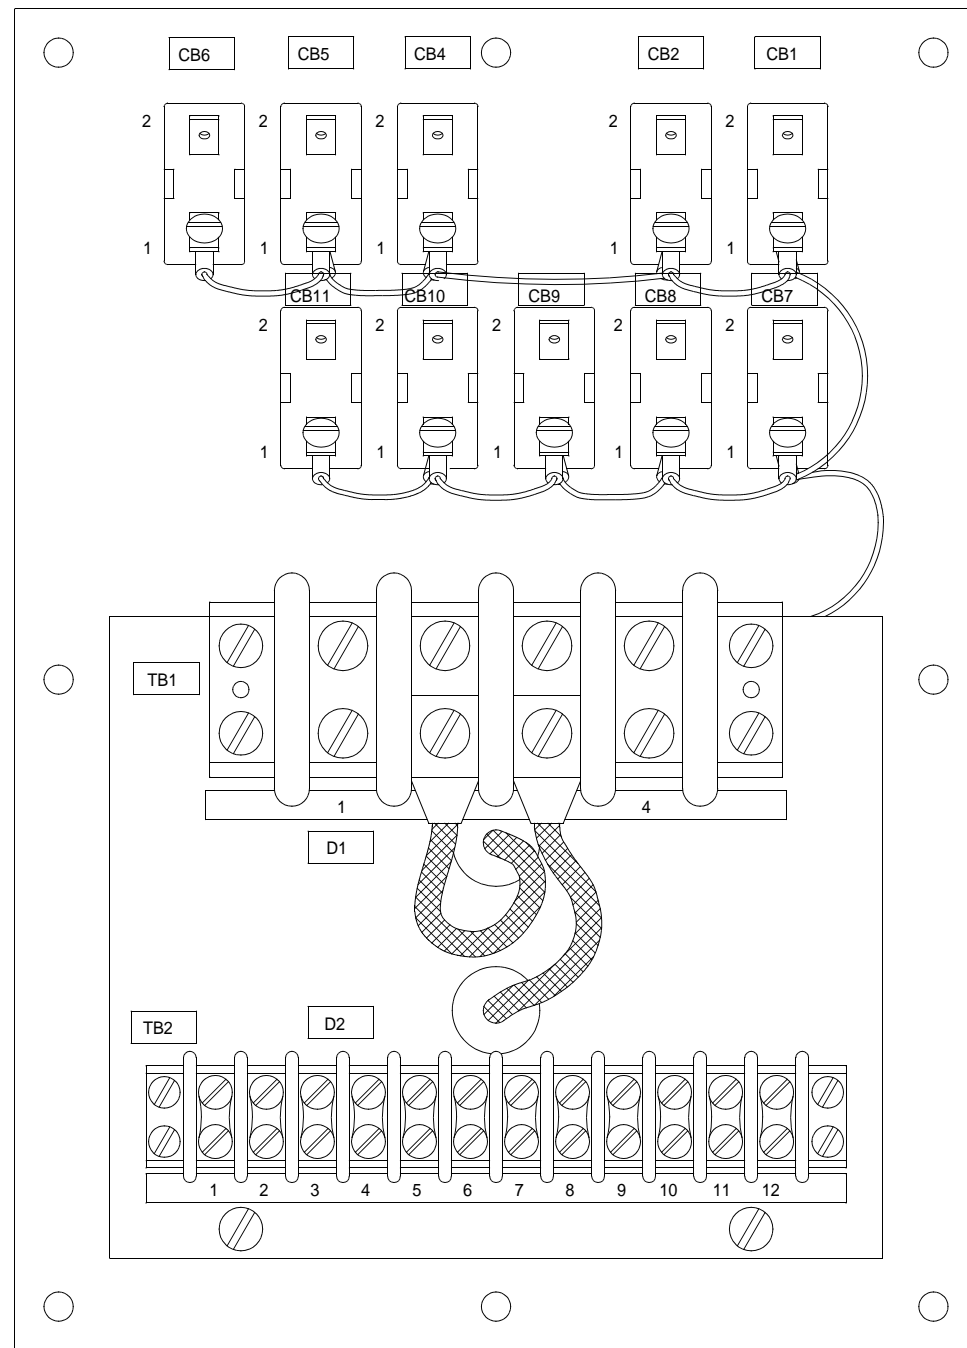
Middle Control Panel "A1" Assembly Wiring.
